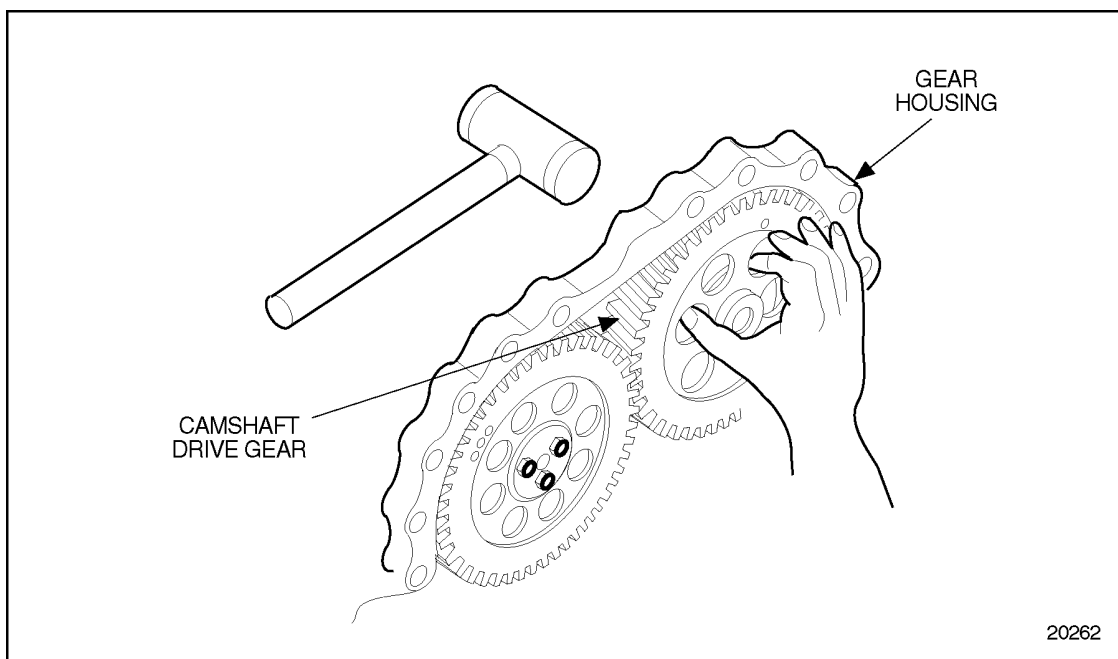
Removing Camshaft Thrust Plate Assembly
